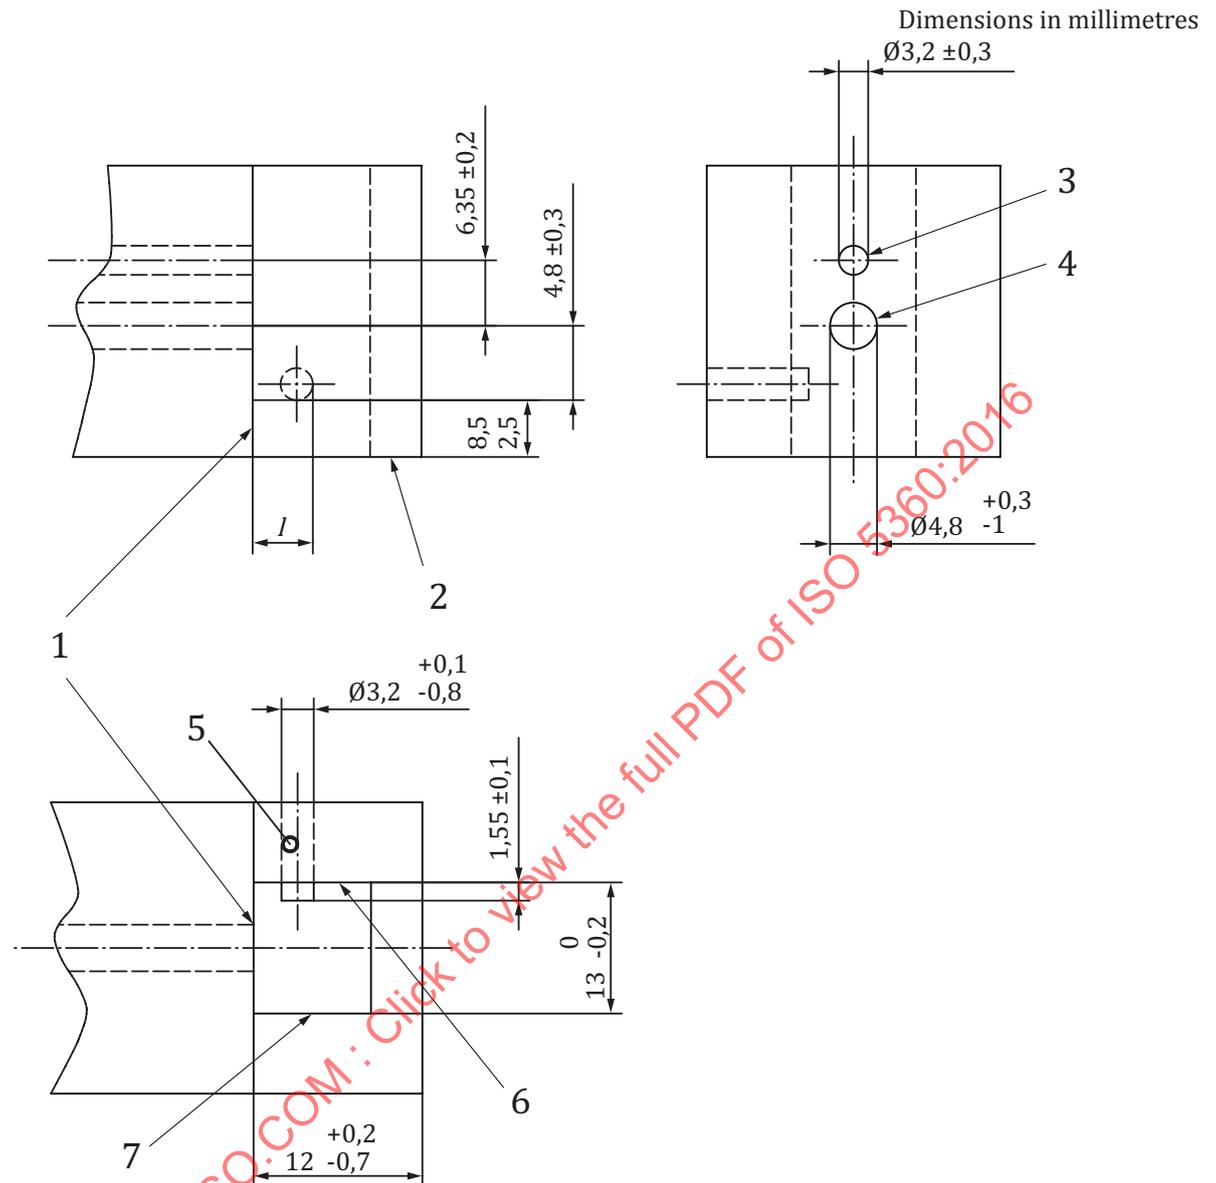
Configuration and dimensions of agent-specific bottle connectors
